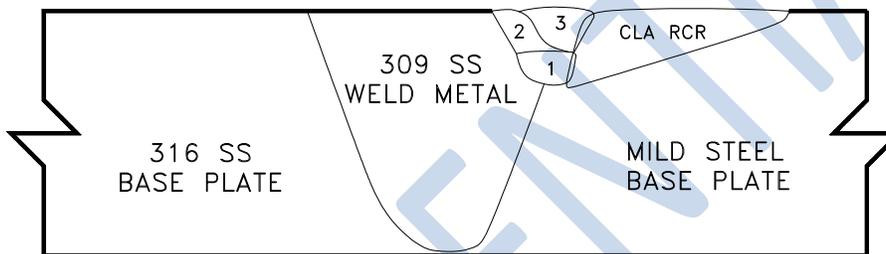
Bead Sequence for Stainless Steel Weld Metal
